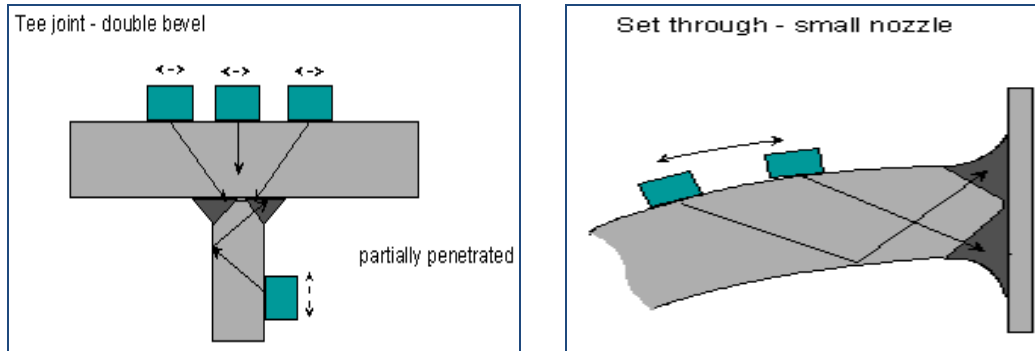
, Ultrasonic Inspection of Other Weld Joints
